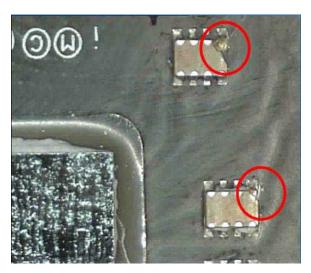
Example for Damage Caused by Heat Sink Contact
